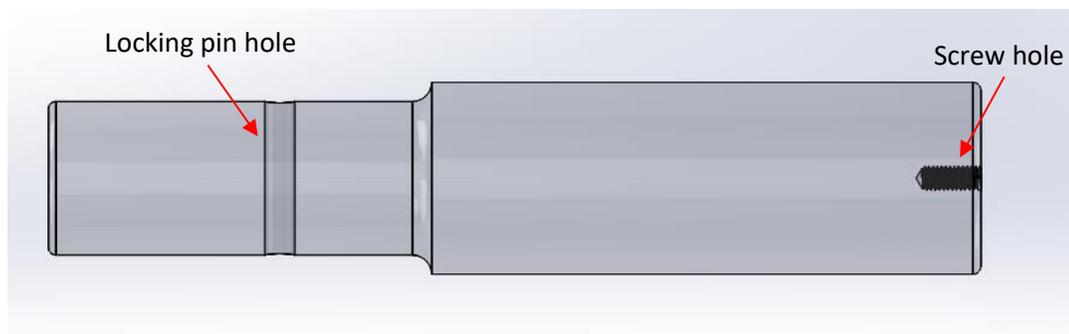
Solid Step-down Shaft in Final Idle End Design, Side View
